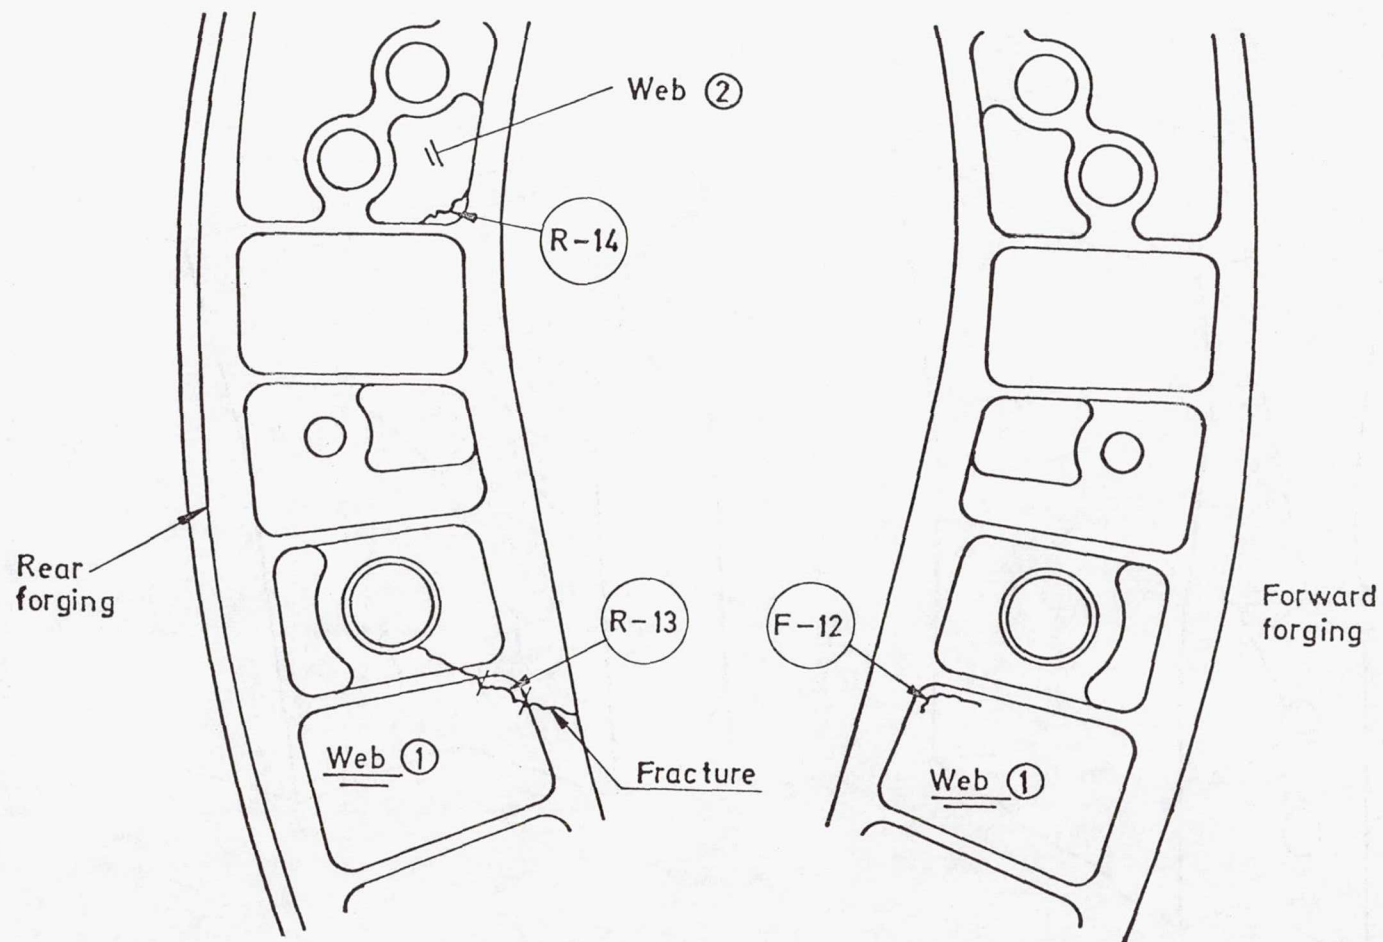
Test specimen B<sub>1</sub> with fatigue cracks and the location of failure indicated.
